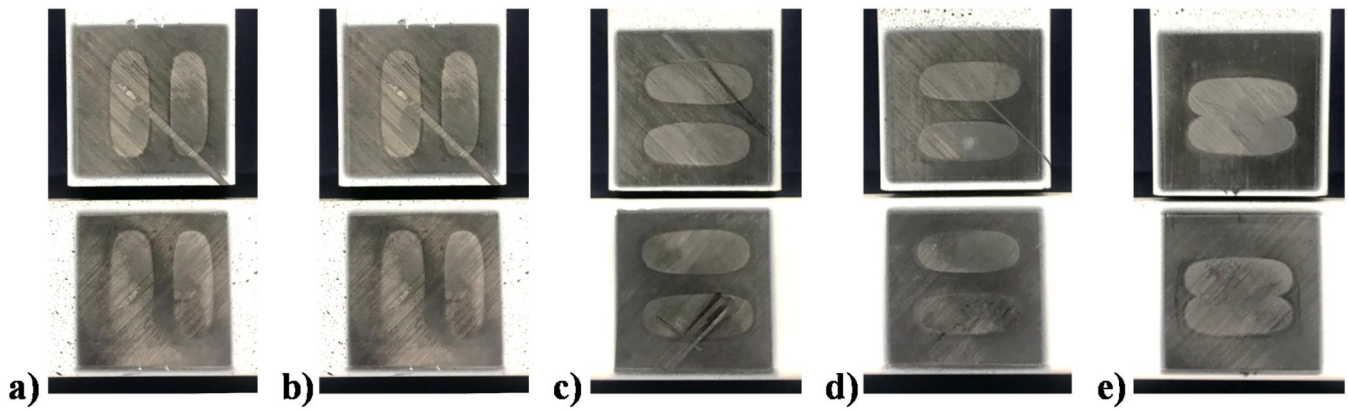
Welded interface after separation: (a) specimen 1; (b) specimen 2; (c) specimen 3; (d) specimen 4; (e) specimen 5.
